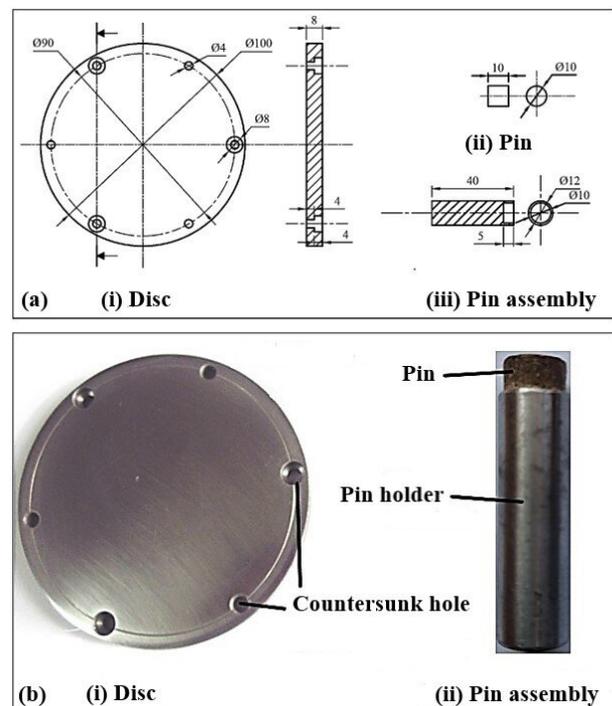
(a) Drawing of disc, pin, and pin holder in mm, (b) Disc and pin assembly specimens
